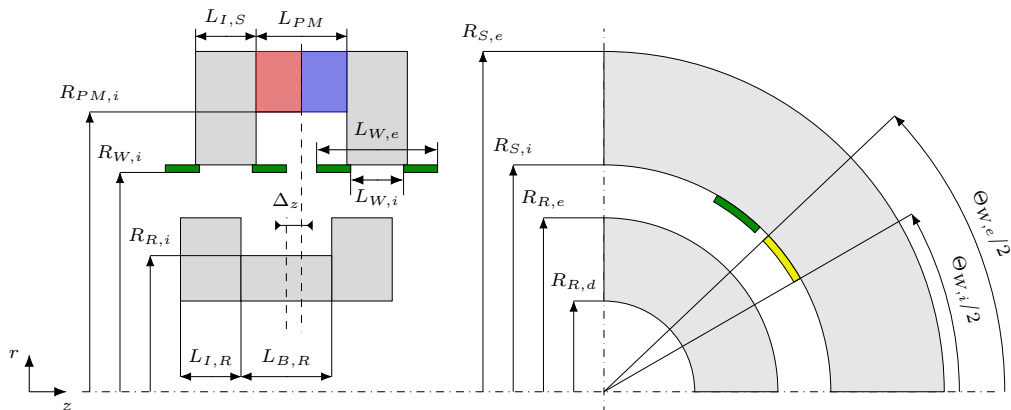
Cross-sectional view of the SHH-AMB with rotor saliencies and symbols used to describe its dimensions.
